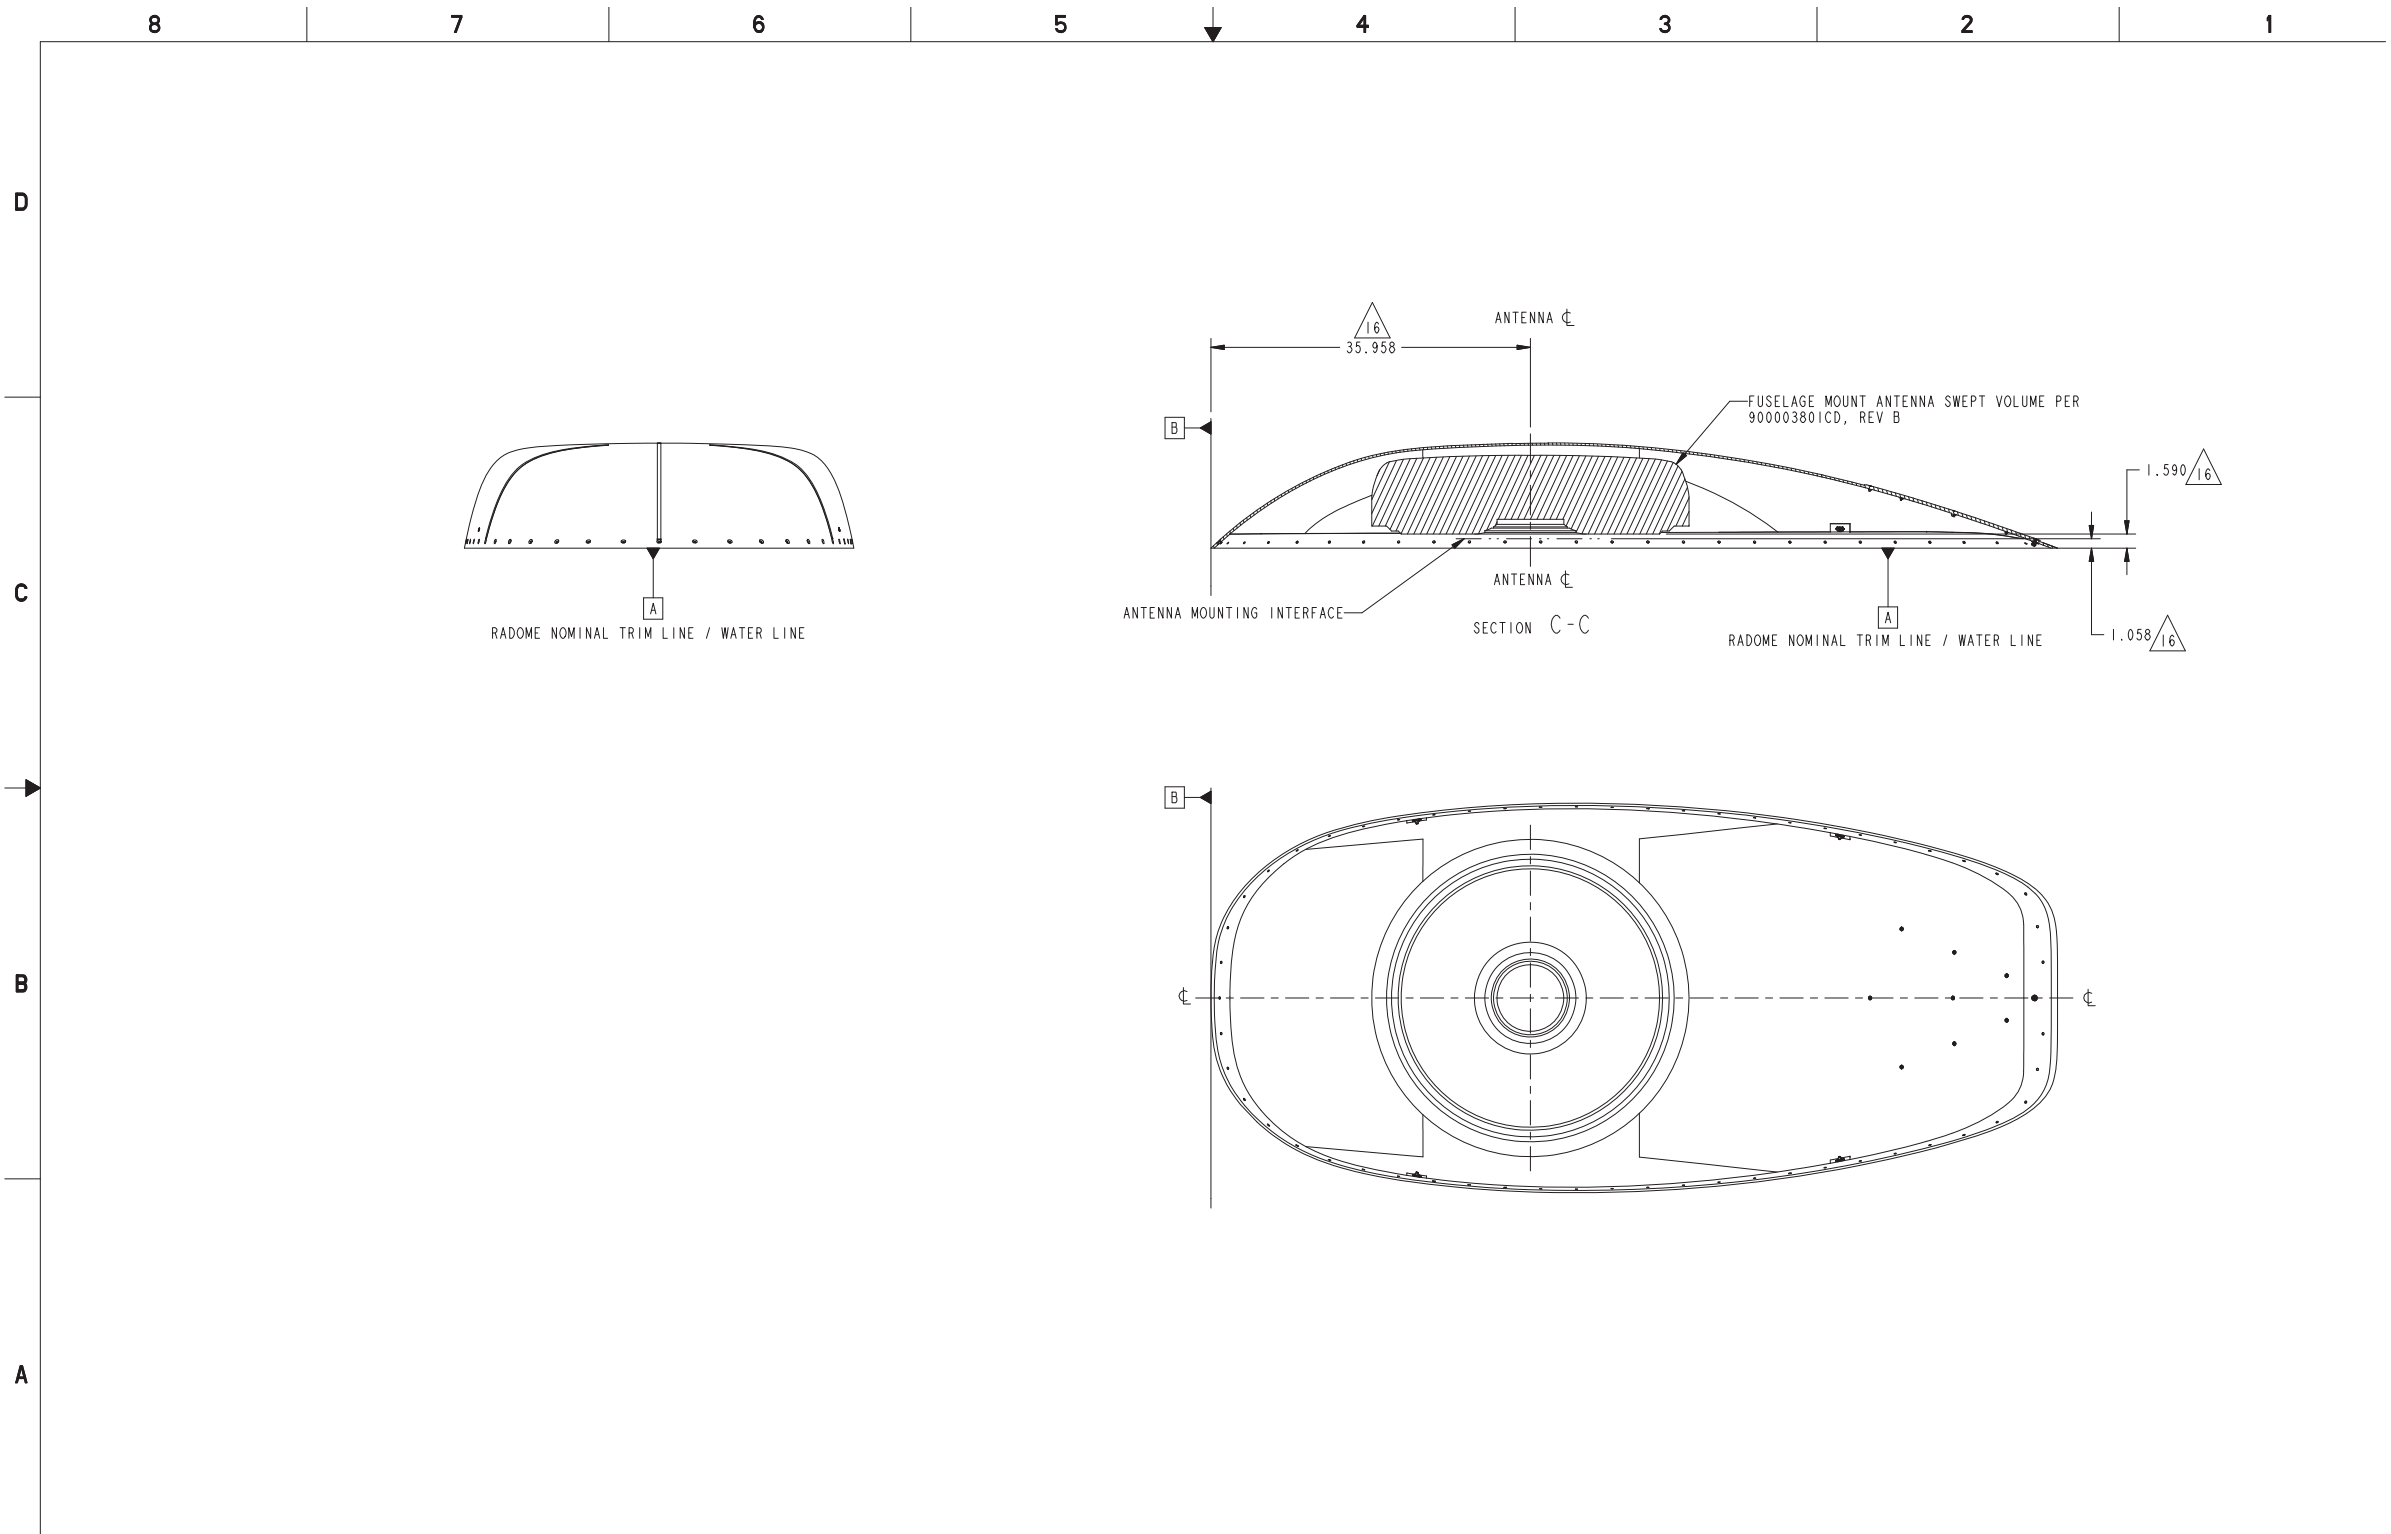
Fuselage Mount Radome Outline and Installation Drawing (Sheet 5 of 6)
